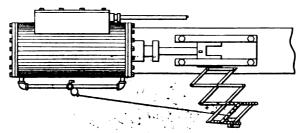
Plan View, Showing Attachment of Pantograph.
